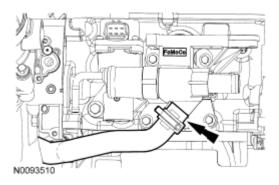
Locating Coolant Outlet And Bolts Courtesy of FORD MOTOR CO.
